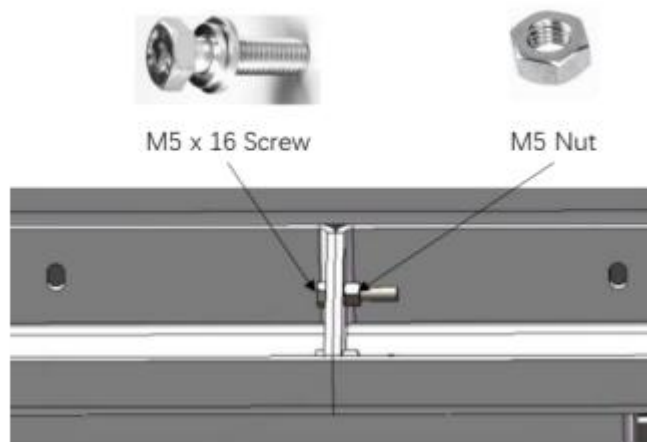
14 Assembly of M5 x 16 screw and M5 nut for fastening
